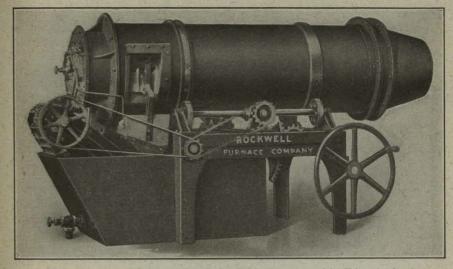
Automatic and continuous hardening furnace, with tilting mechanism.
